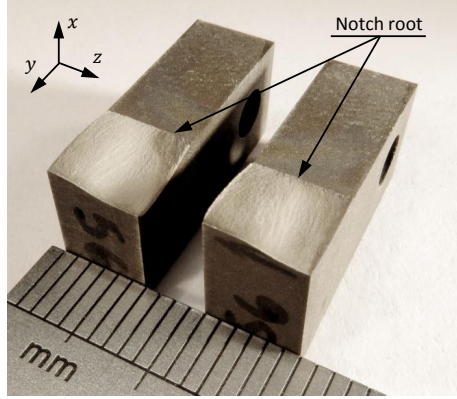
Photograph of sample CT 1 showing the brittle fracture surfaces. The ruler scale is in millimetres.
